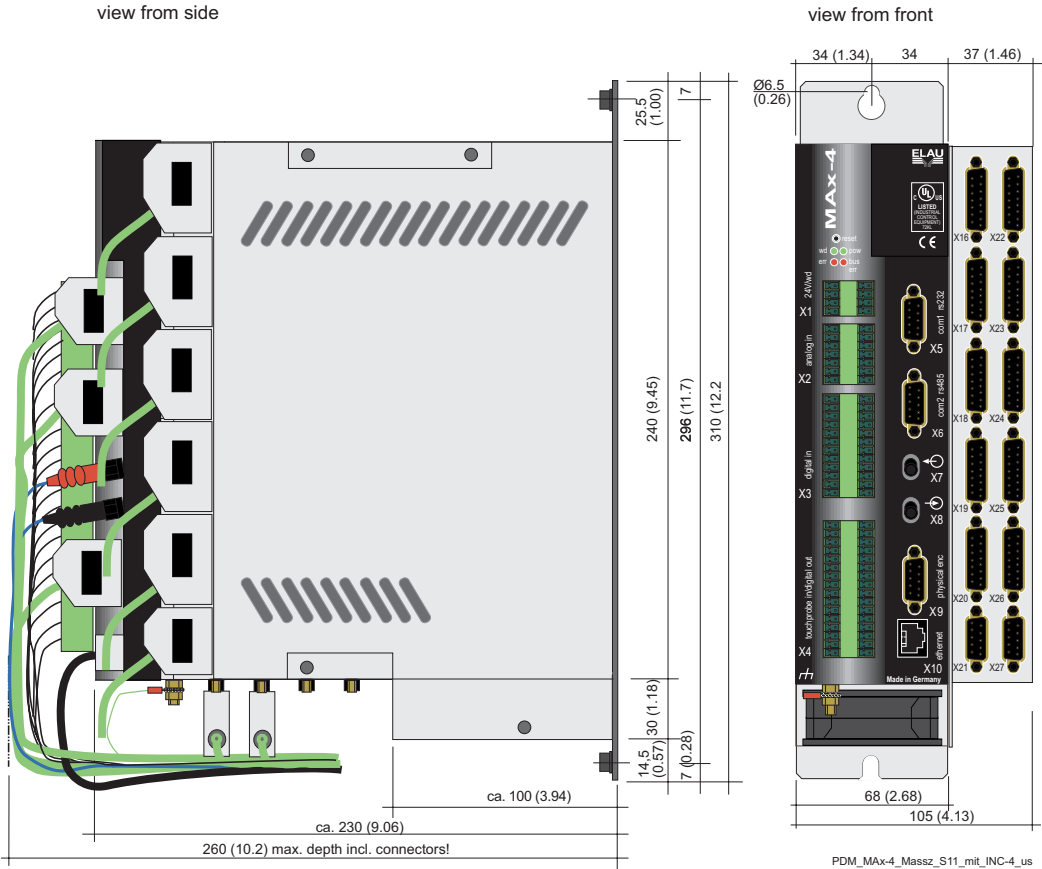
Dimensions of the PacDrive MAX-4 / "special casing" for additional connector plugs
